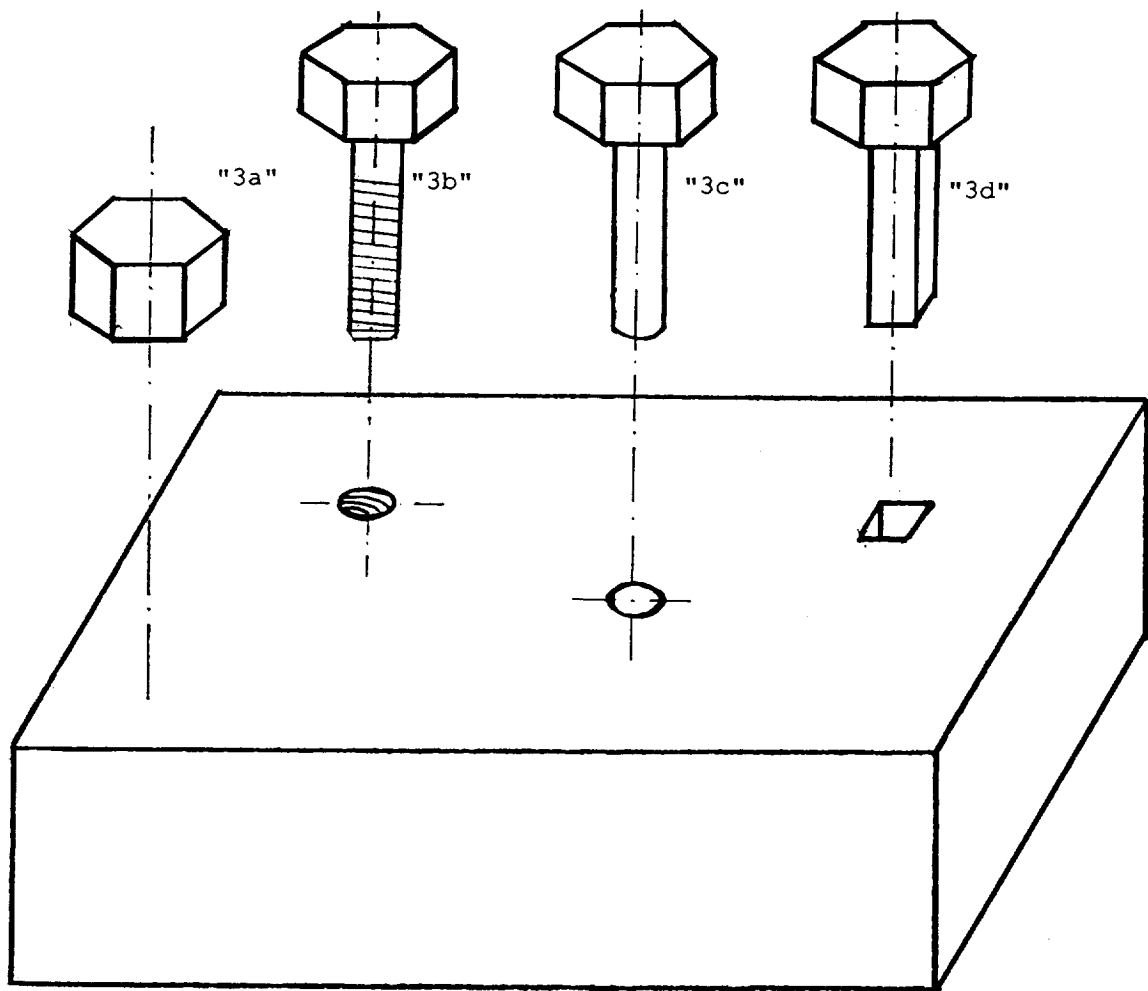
Various Instances of the Two-Part Disassembly/Assembly Problem.
